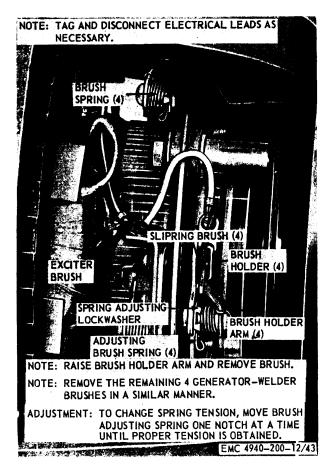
Generator-welder brushes, removal, installation, and adjustment.
